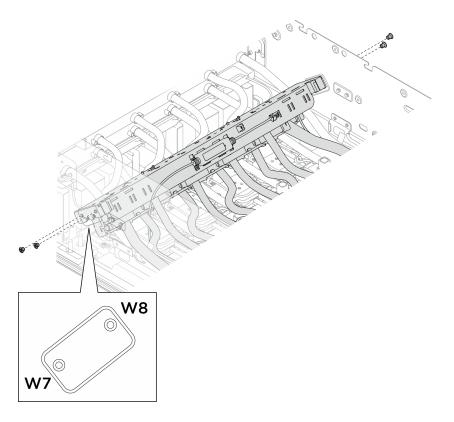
Removing the rear H100/H200 GPU cold plate module manifold
